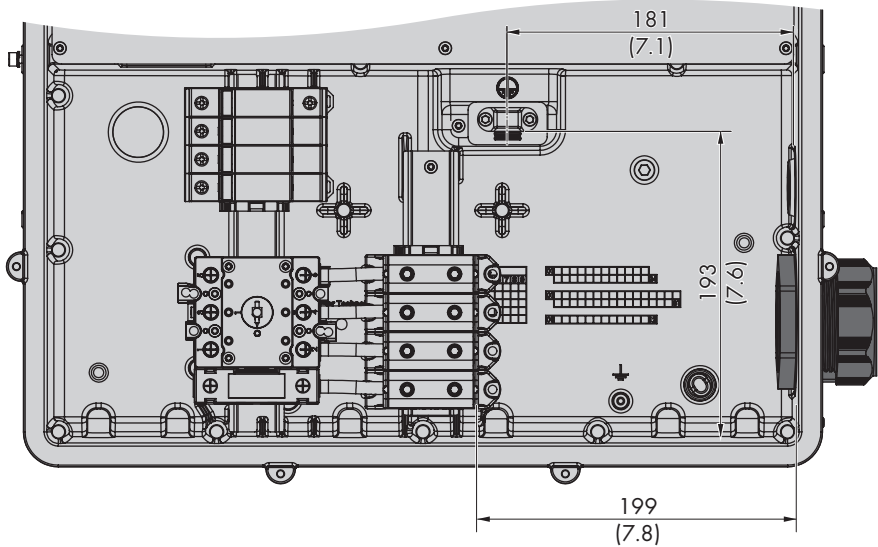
Interior view of the AC connection unit with dimensions for the conductors (dimensions in mm (in))
